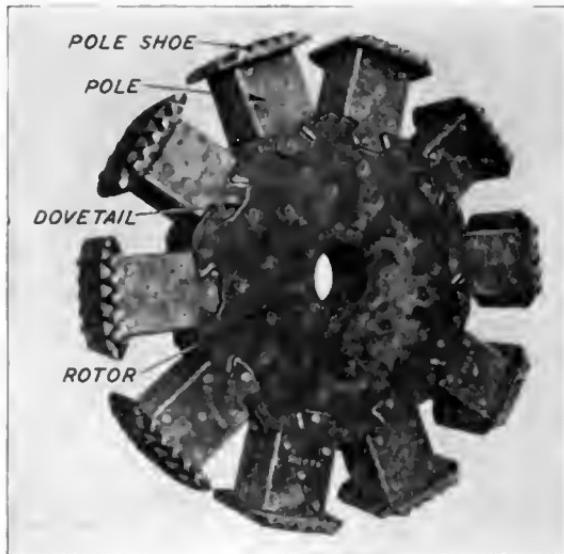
A Large High-Speed Rotor with Pole Pieces Dovetailed to It
